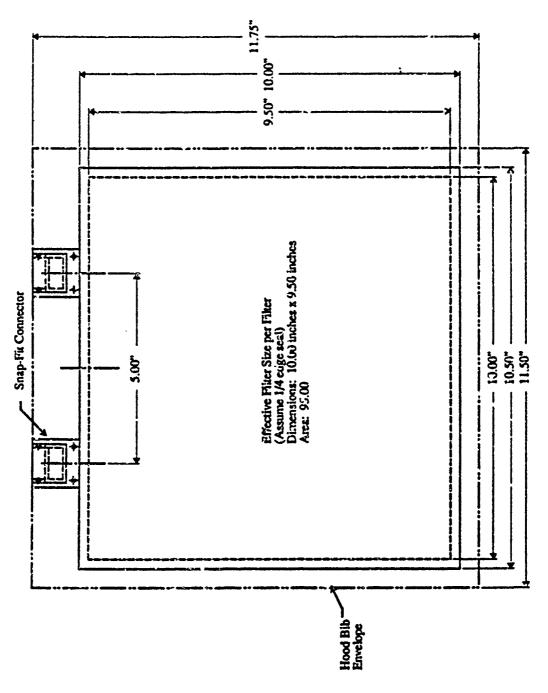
FILTER ASSEMBLY: 100 SQ IN
